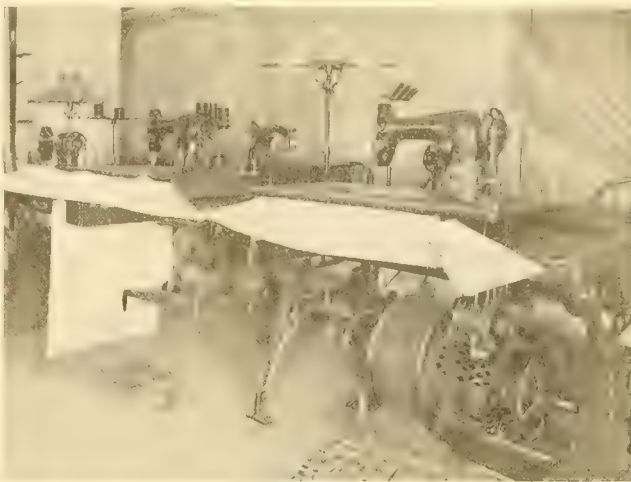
SLOW-SPEED, DIRECT-CURRENT MOTOR MOUNTED UNDER POWER SEWING MACHINE TABLES
